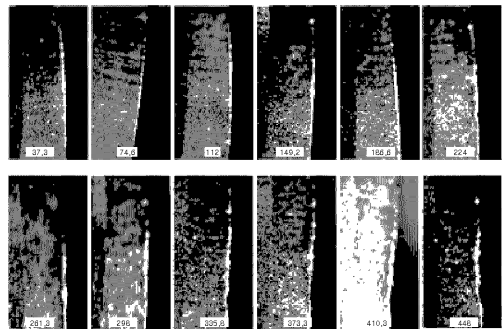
Photograph of the primary flank surface showing progress of wear (with oil mist)
